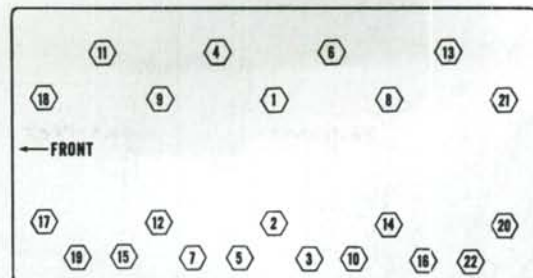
On diesel models, tighten cylinder head stud nuts to a torque of 85 Ft.-Lbs. using the sequence shown.
